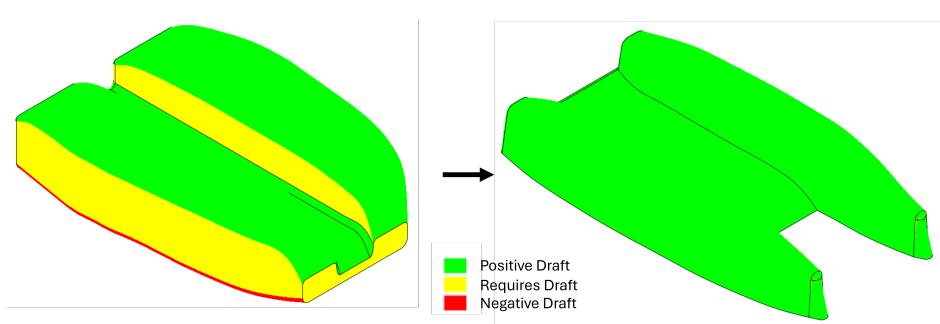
Draft Angles for Vacuum Forming (Initial to Final Design)
